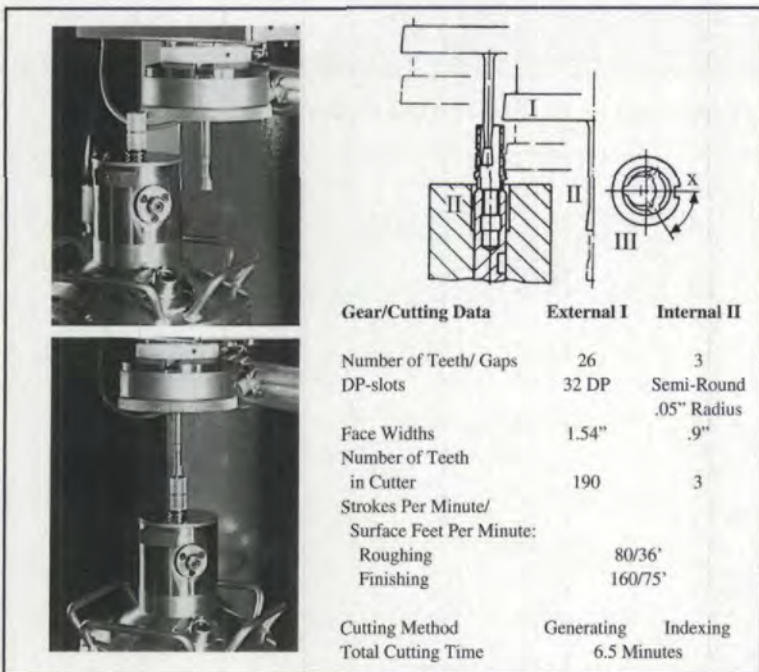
Cutting an external spline and internal recessed slots with a tooth location requirement in a single setup. This is an aircraft engine component!
